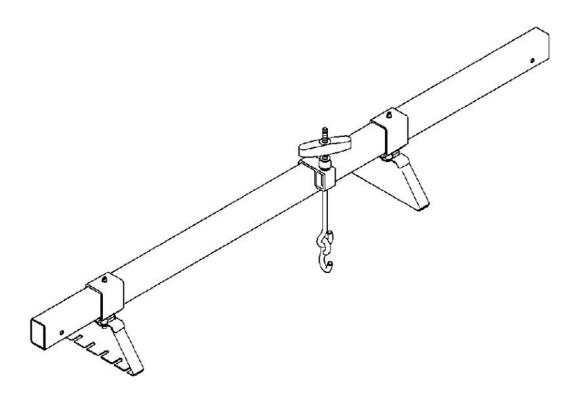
Engine Support Fixture 8534 Courtesy of CHRYSLER LLC
